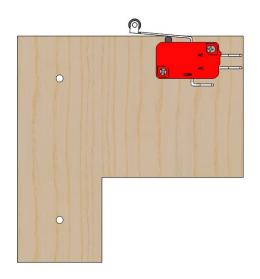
Support plate (SUP_PLT) and limit switch assembly
